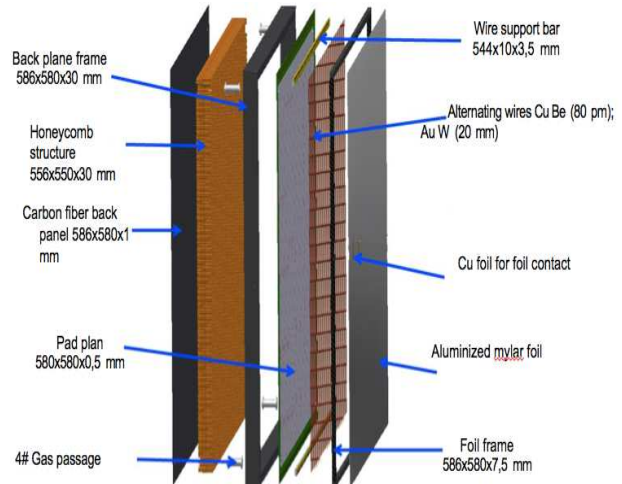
Technical drawing of a TRD prototype with alternating wires and carbon frame.
